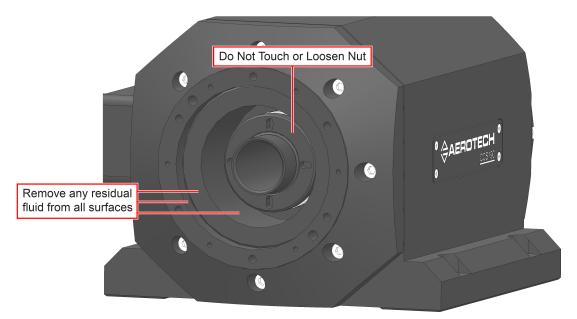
Collet-Chuck Piston and Piston Housing Cleaning
